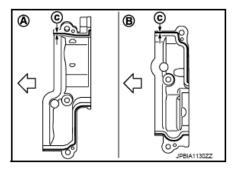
Identifying Continuous Bead Of Liquid Gasket Applying Area On Camshaft Courtesy of NISSAN NORTH AMERICA, INC.
